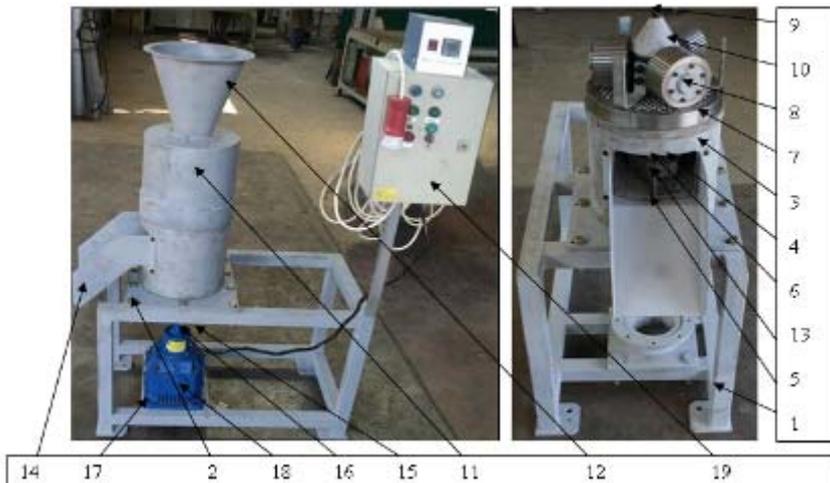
Pelleting equipment – EP-0; 1 – frame; 2 – supporting plate; 3 – case; 4 - shaft; 5 – evacuating rotor; 6 – cutting rotor; 7 - mould; 8 – pressing assembly; 9 – special screw; 10 – leading cone; 11 – electric installation; 12 – protection case; 13 – lubrication system; 14 – evacuating chute; 15 – dog clutch; 16 – motoreduction axle; 17 – motoreduction support; 18 – motoreduction device; 19 – electric installation
